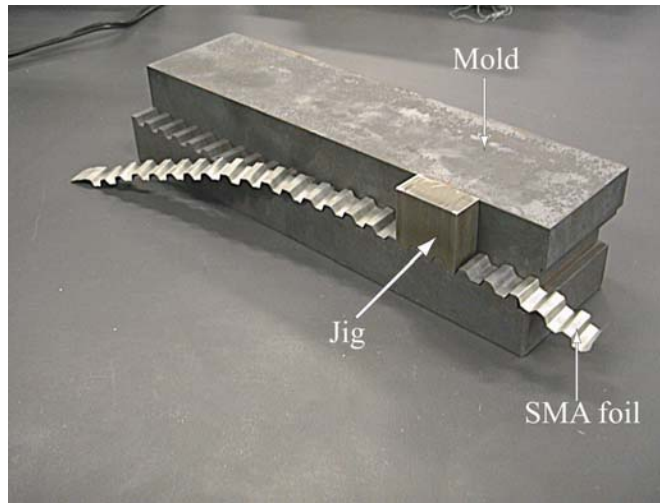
Folding of SMA foil into a hexagonal geometry by mold and jig.
